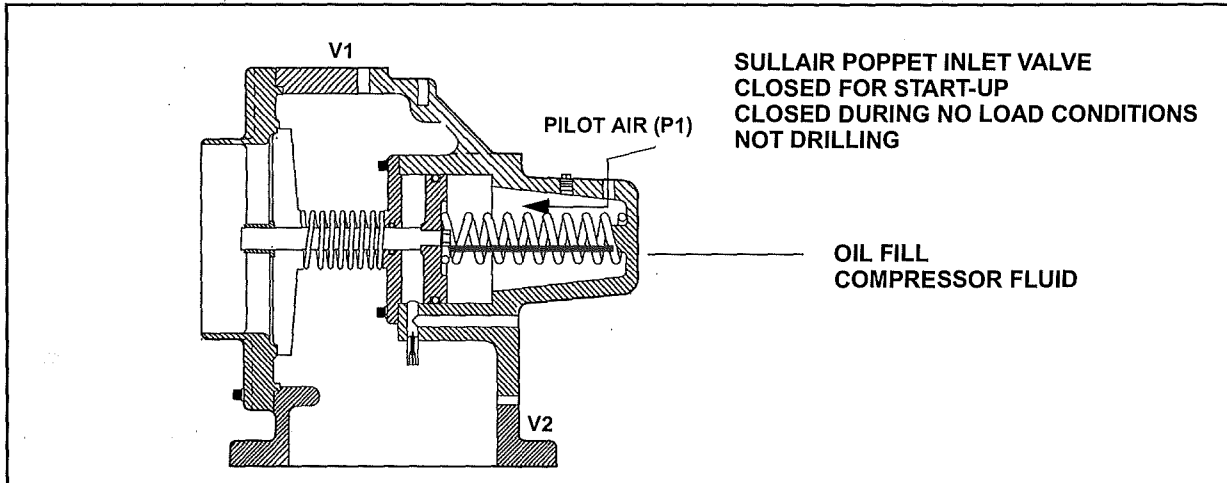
schematic shown as normal condition for all components. Machine is not running. This is a closed inlet valve in an unload condition.
